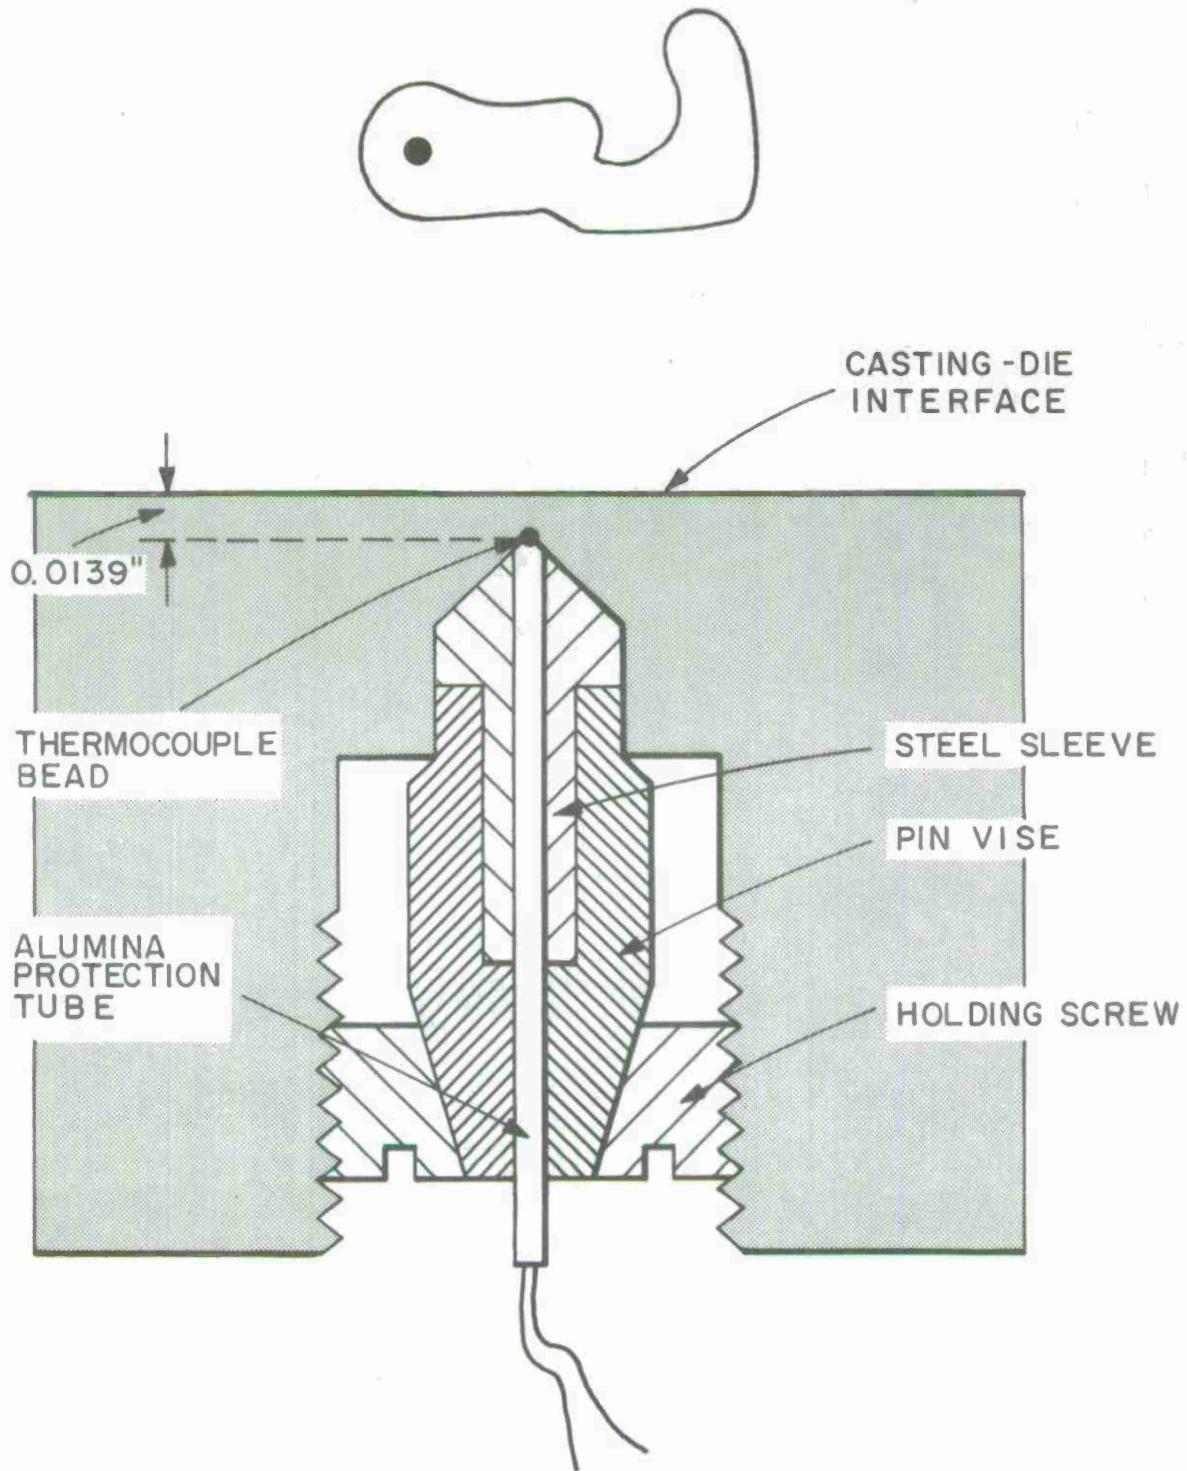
Schematic of thermocouple assembly in the high pressure die casting machine. Figure on top shows position of the thermocouple in the die cavity.
